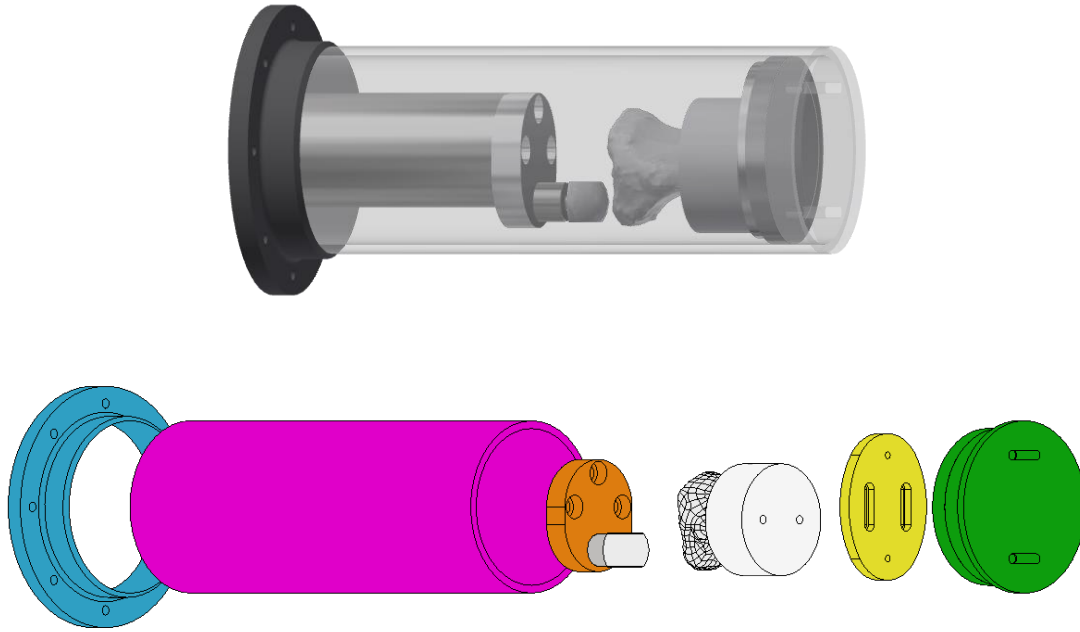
3D rendering of the custom loading rig for use with HR-pQCT, in assembled form (top) and in an exploded view (bottom). Shown in blue is the flange to attach to the Zwick actuator, orange is the offset steel bracket, yellow is the aluminum sliding plate, green is the slotted acrylic endcap, and magenta is the acrylic tube.
